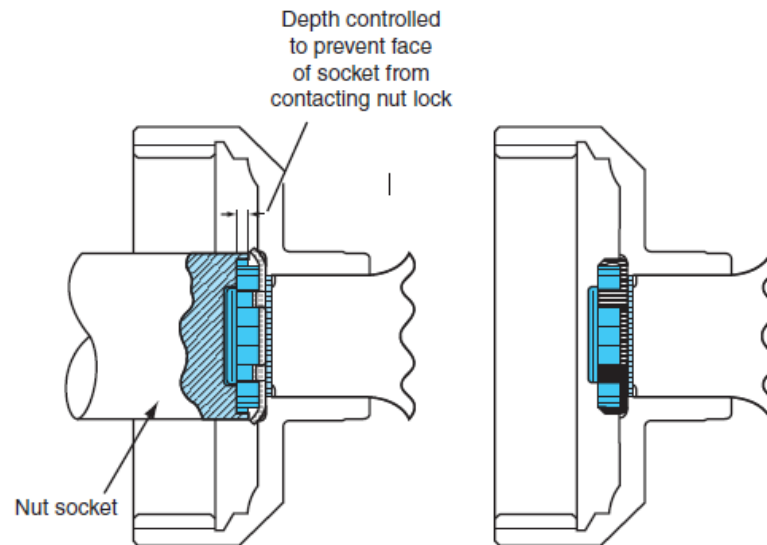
Illustration shows the position the wrench must be in to avoid shearing the inner tang on the lock plate
